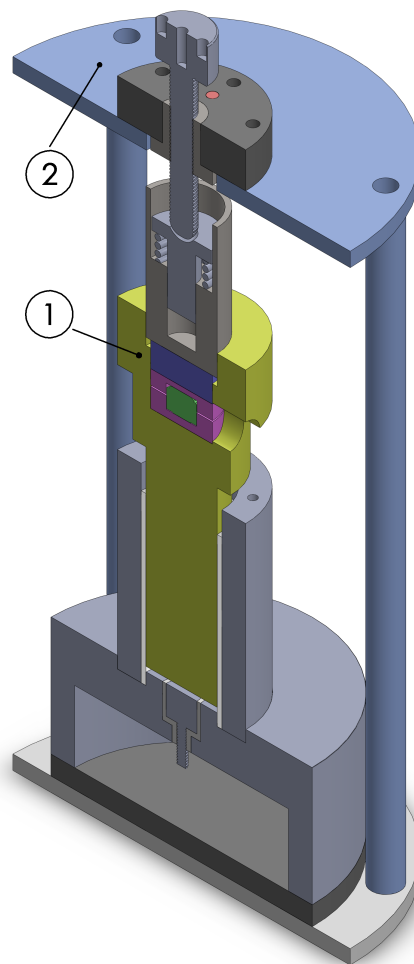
Section view of the new measurement setup, 1. new electrode, 2. support structure.
